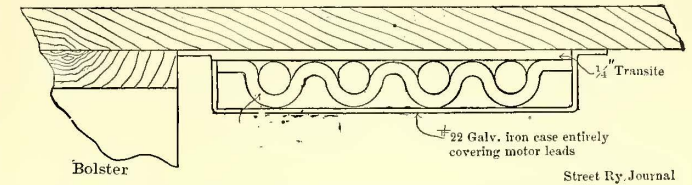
SECTION THROUGH CAR FLOOR, SHOWING METHOD OF CARRYING MOTOR WIRES TO JUNCTION BOX
